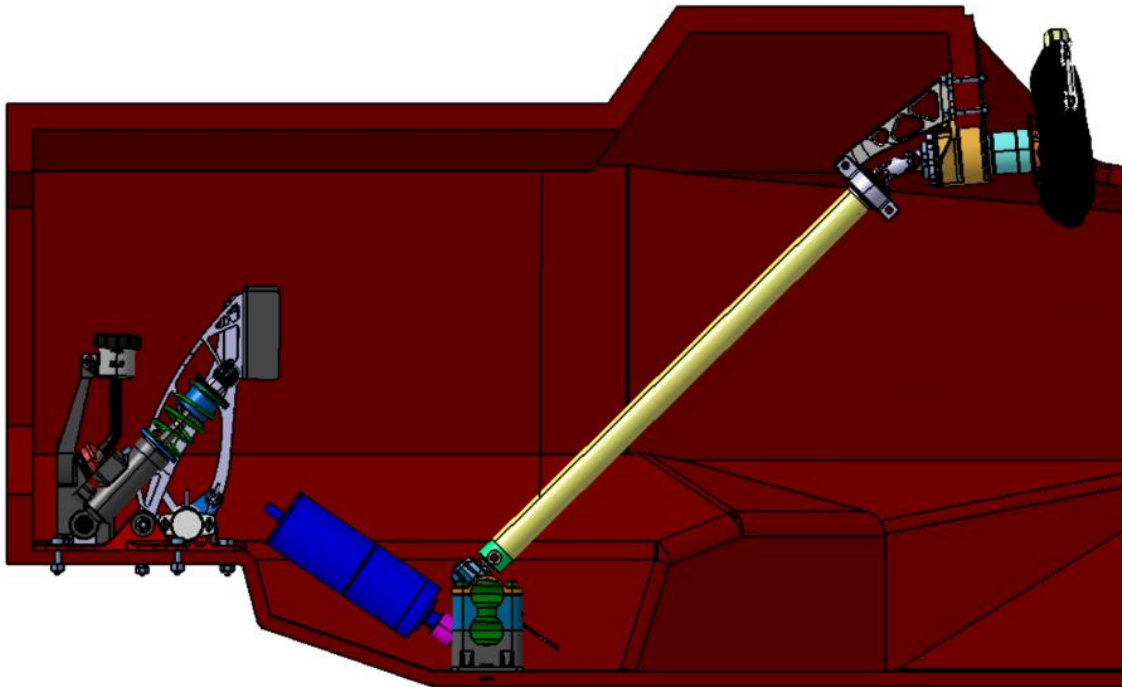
Solution 5 - BLDC motor + gearbox actuating a parallel secondary rack
